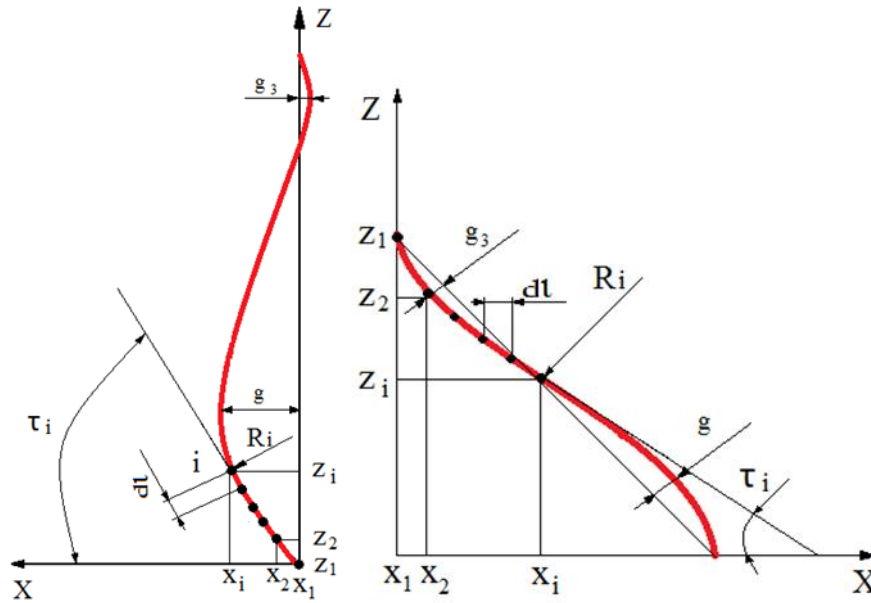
Geometric parameters of the reference profile for a butt weld formed on a vertical plane (a) and a fillet weld formed in the flat position (b).
